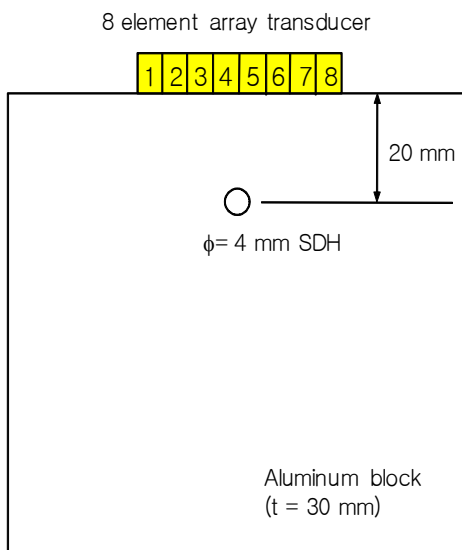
Aluminum block specimen with a side-drilled hole(SDH)
